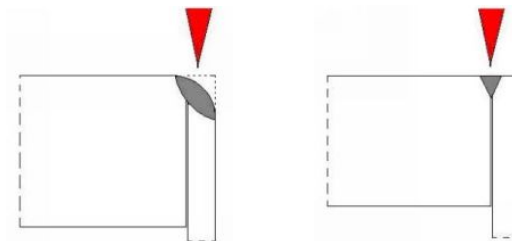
Complete fusion of tube thickness (left) and partial fusion of tube thickness (right)
